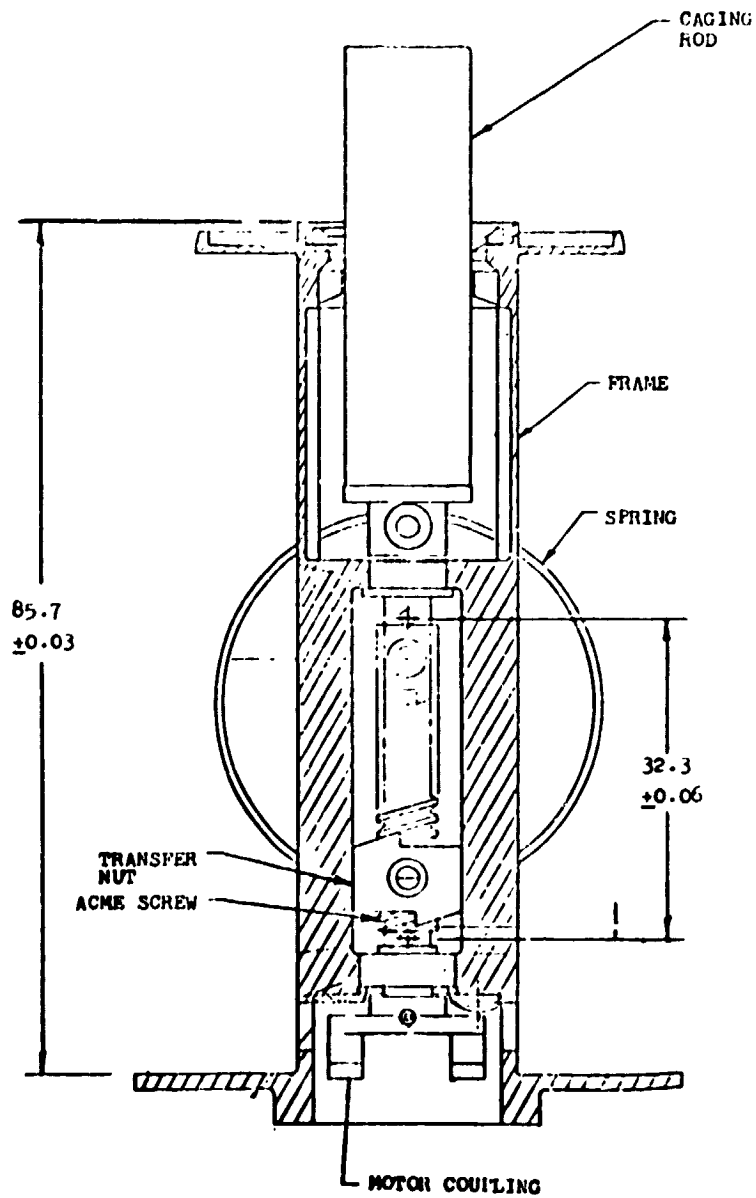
CROSS SECTION OF CAGING MECHANISM.
